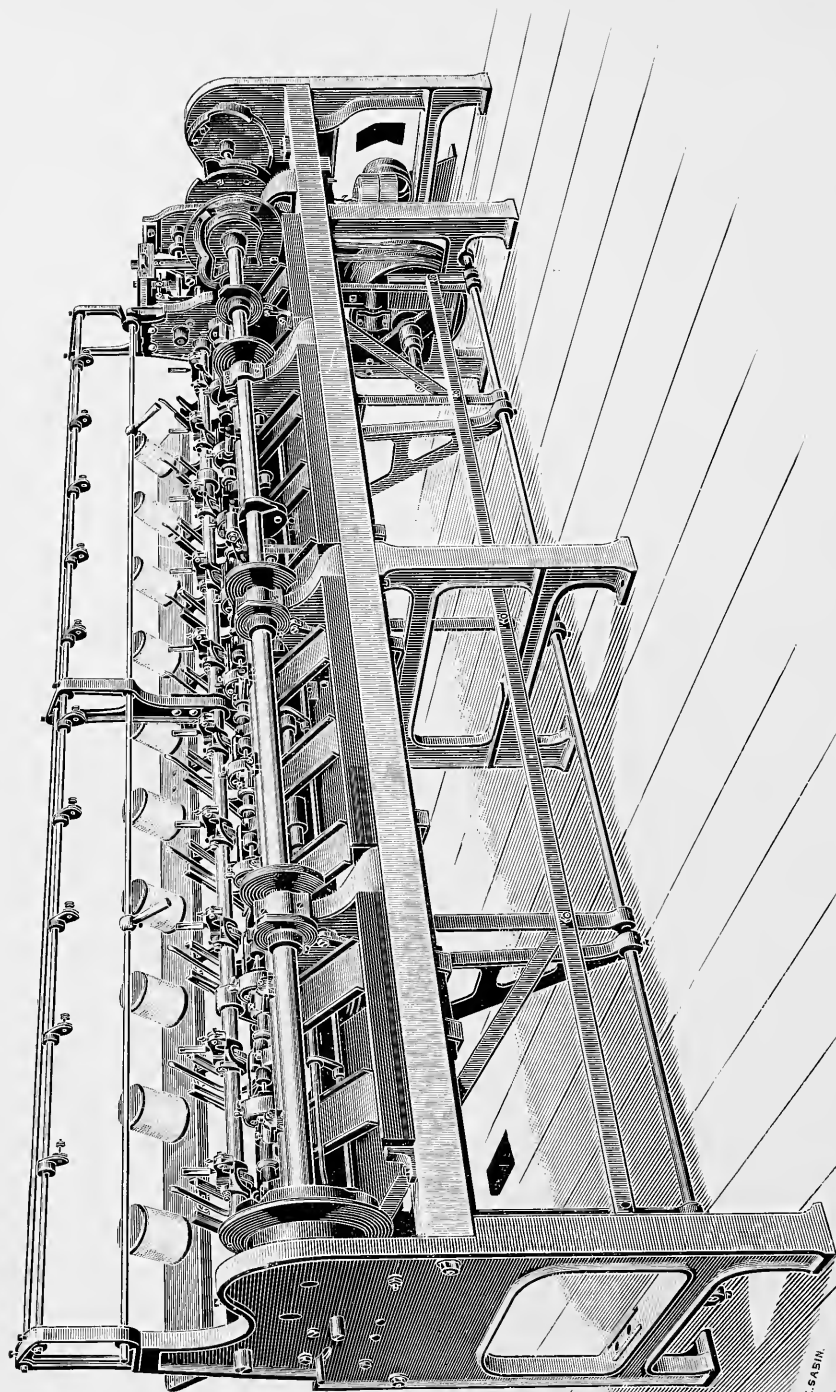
New automatic thread spooling machine (Booth's patent).
